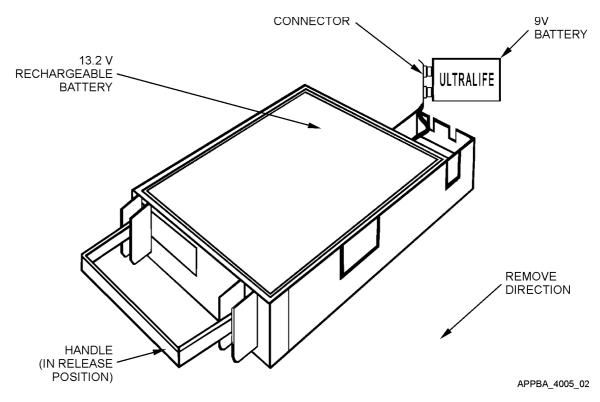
Remove/Replace Battery Housing Assembly For PU NSN 7021-01-474-3793/NSN 7021-01-487-0578
